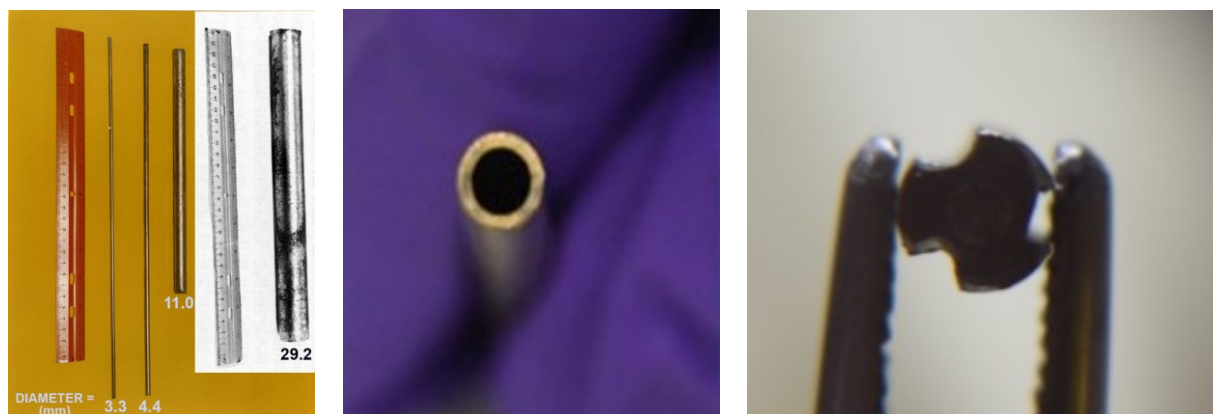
Left) Counter-gravity injection cast fuel slugs. Middle) Annular cross section of extruded fuel. Right) Machined grooved fuel for testing purposes.
